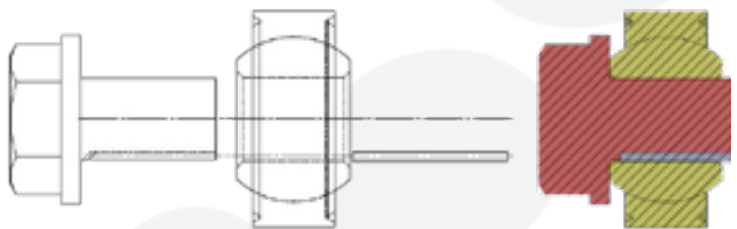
Breakaway torque tool and gauge pin correctly fitted into bearing bore
